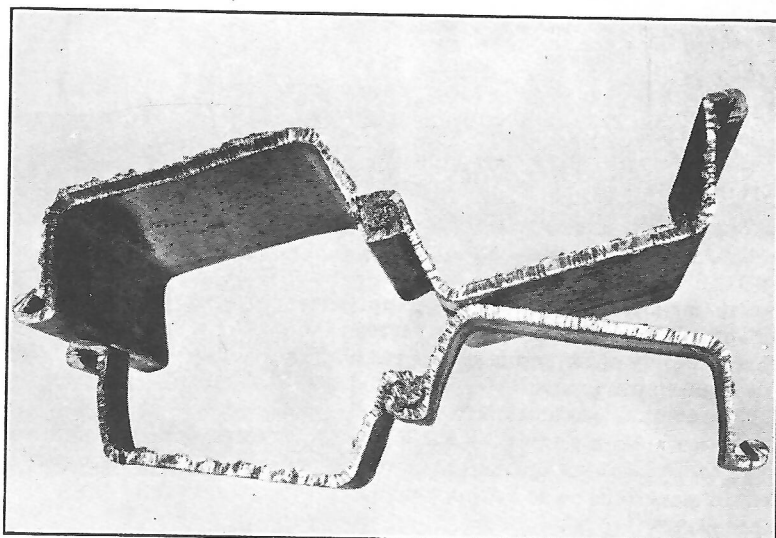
Examples of underwater cuts through steel, using the oxy-hydrogen cutter
